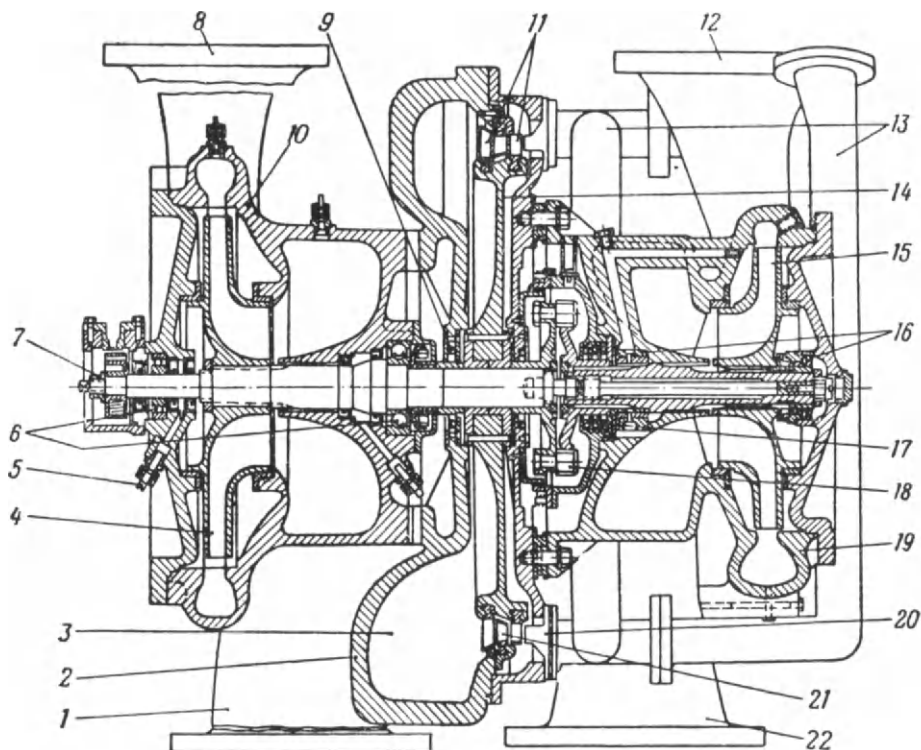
Turbopump assembly of a V-2 rocket motor: 1, alcohol intake; 2, turbine housing; 3, turbine outlet manifold; 4, alcohol pump impeller; 5, drain fitting for leaked alcohol; 6, ball bearings; 7, governor; 8, alcohol intake flange; 9, turbine shaft packing; 10, alcohol pump housing; 11, turbine blades; 12, oxygen intake flange; 13, steam inlet pipes; 14, turbine wheel; 15, oxygen pump impeller; 16, oxygen pump bearings; 17, shaft packing; 18, coupling; 19, oxygen pump housing; 20, turbine nozzle; 21, turbine stator; and 22, oxygen intake.
